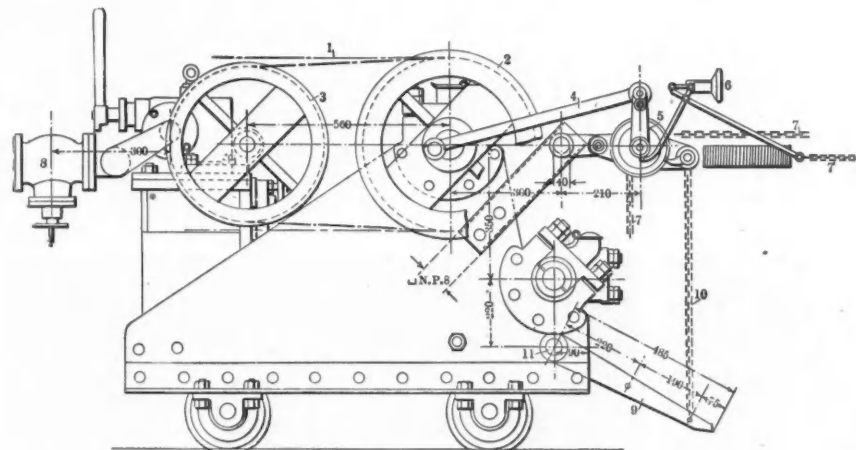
COMPRESSED-AIR CUTTING MACHINE
